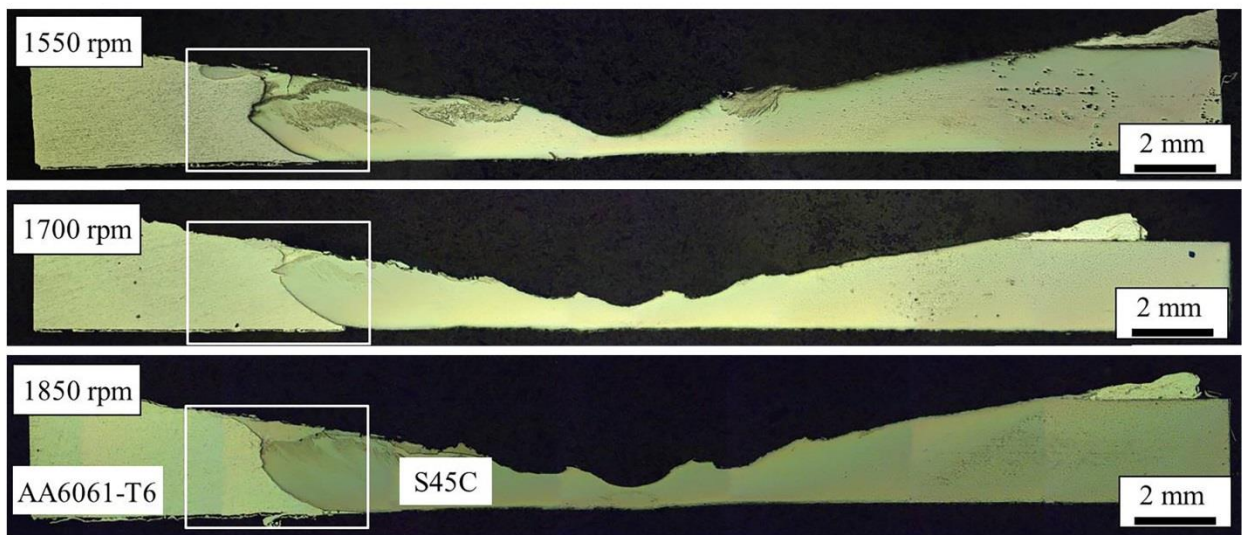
Optical macrographs of the weld cross-sections at three different tool rotational speeds (tool offset 1.5 mm toward the S45C steel side)
